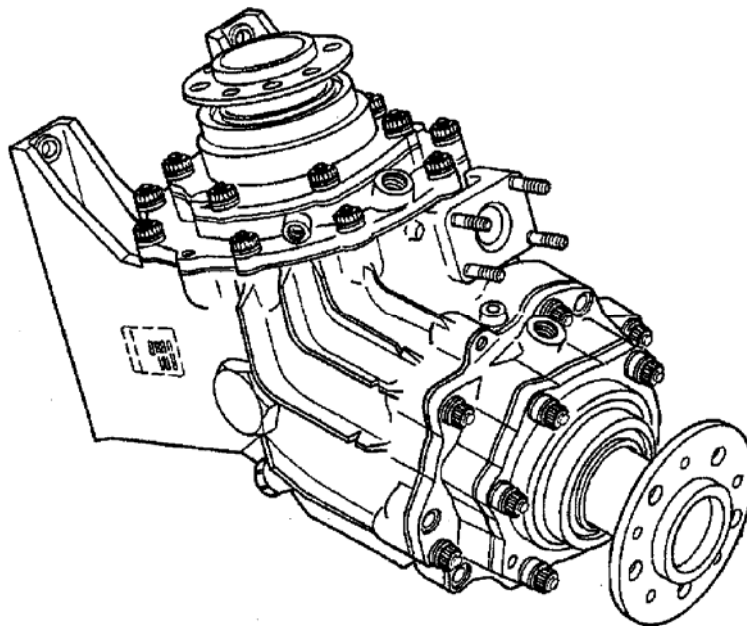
Intermediate Gearbox Assembly (AH-64A/D)
